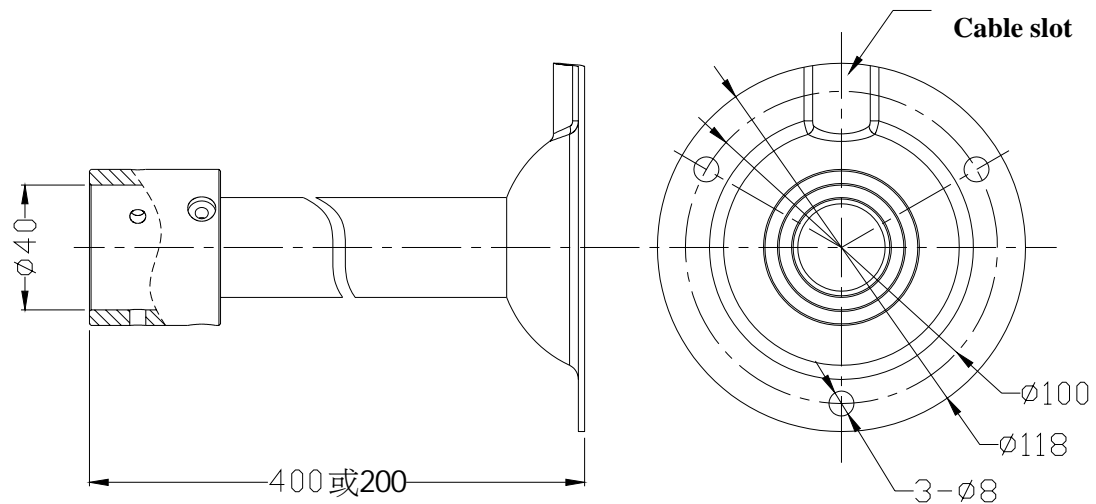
Dimension of Ceiling Mount Bracket
